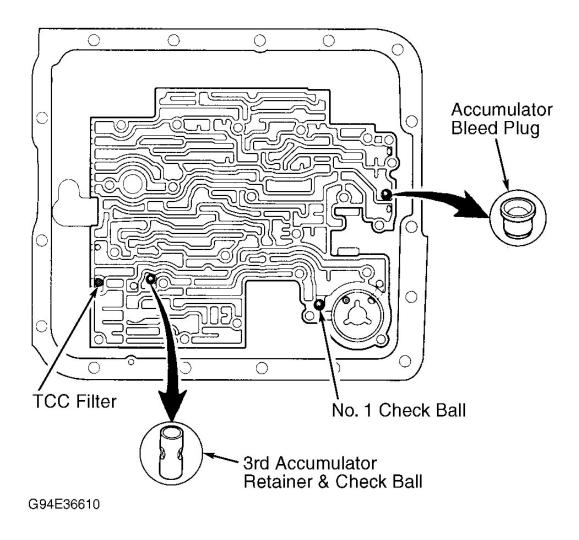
Locating Check Balls In Case (4L60-E) Courtesy of GENERAL MOTORS CORP.
